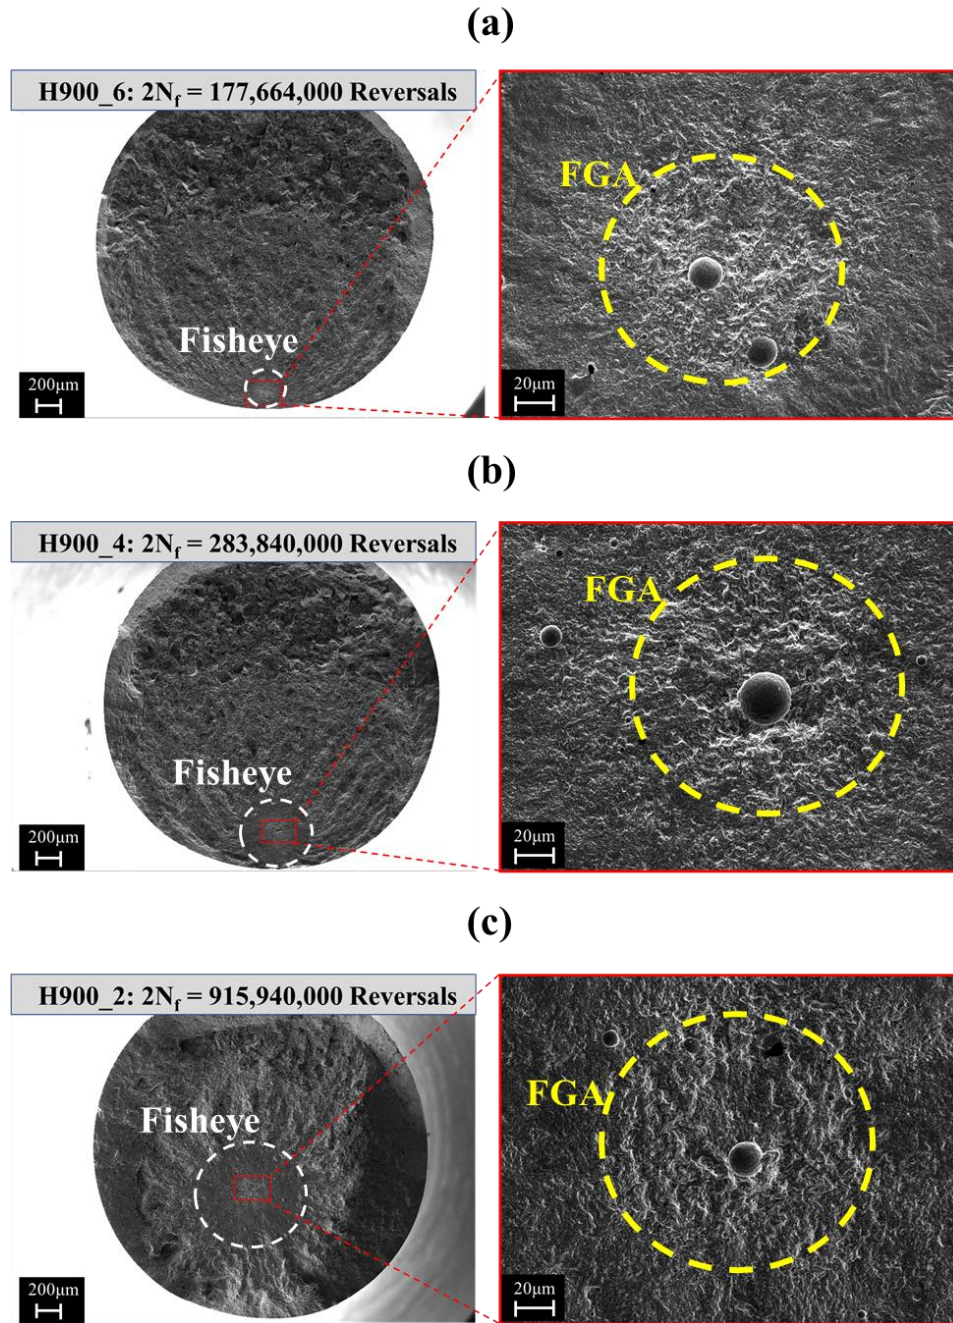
Fracture surfaces of L-PBF 17-4 PH SS ultrasonic CA-H900 specimens with uniform gage tested at: (a) 500 MPa with 177,664,000 reversals to failure, and (b) 475 MPa with 283,840,000 reversals to failure, (c) 450 MPa with 915,940,000 reversals to failure.
